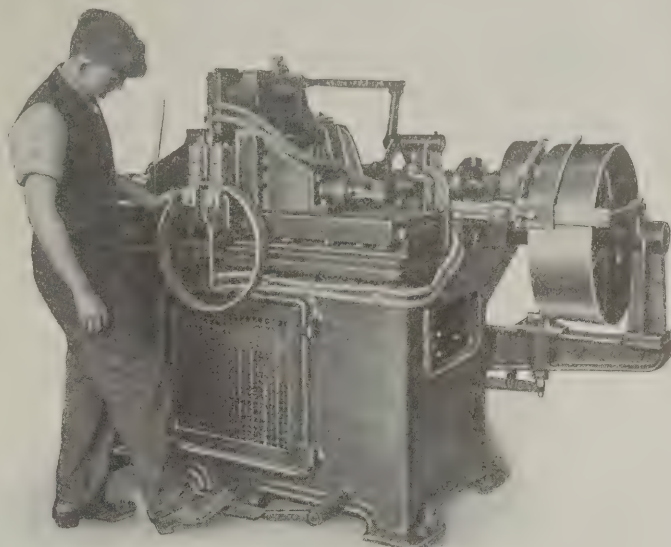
Toledo Power-driven Machine for Welding Flat Tires
